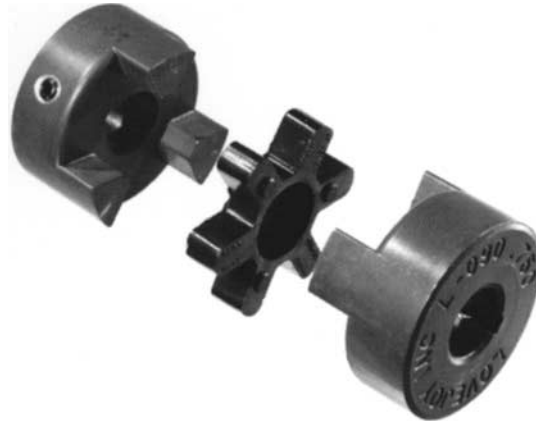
Exploded view of jaw-type compression coupling showing the two hubs and the flexible spider insert. (Lovejoy Inc.)
